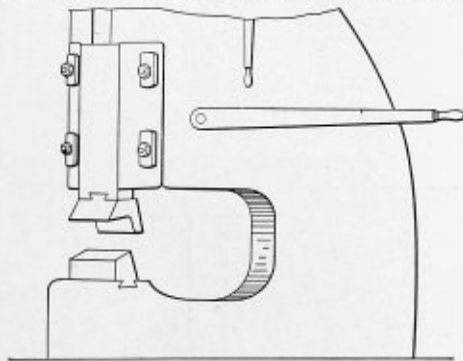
FLANGE FORMERS APPLIED TO A STEAM HAMMER.
